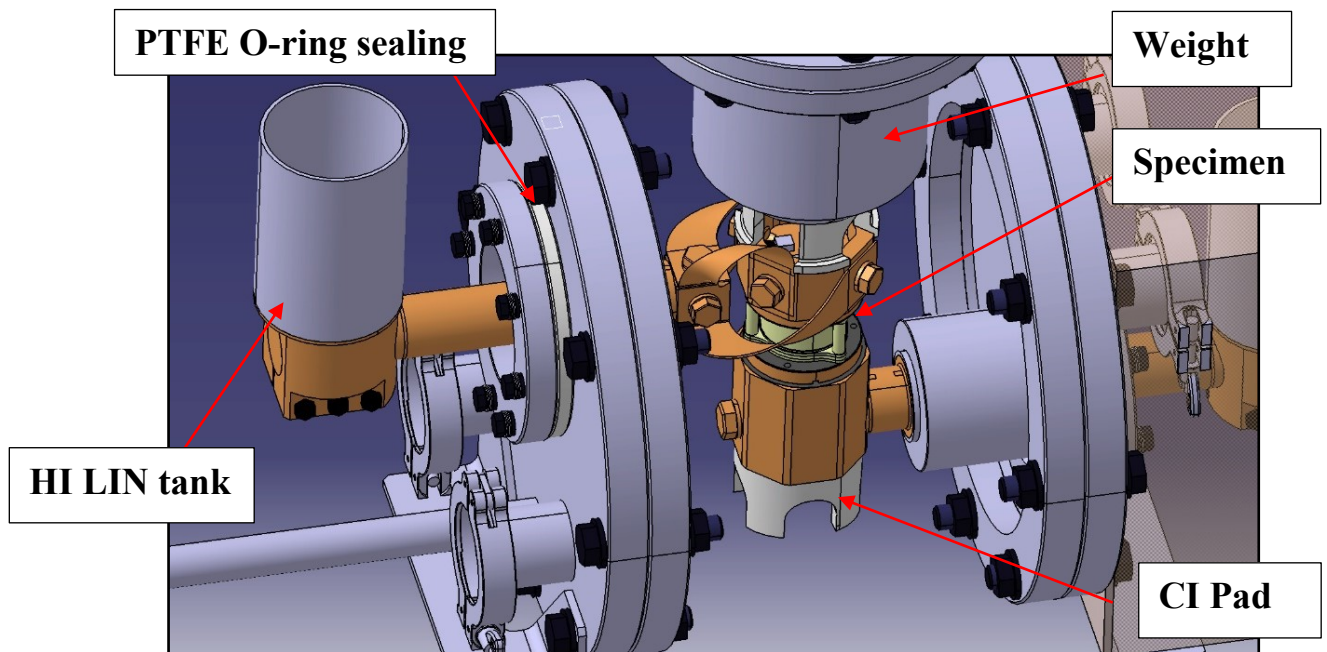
Inner HST Chamber Version 3 assembly. The main T-shaped body and HI LIN tank insulation are hidden.
